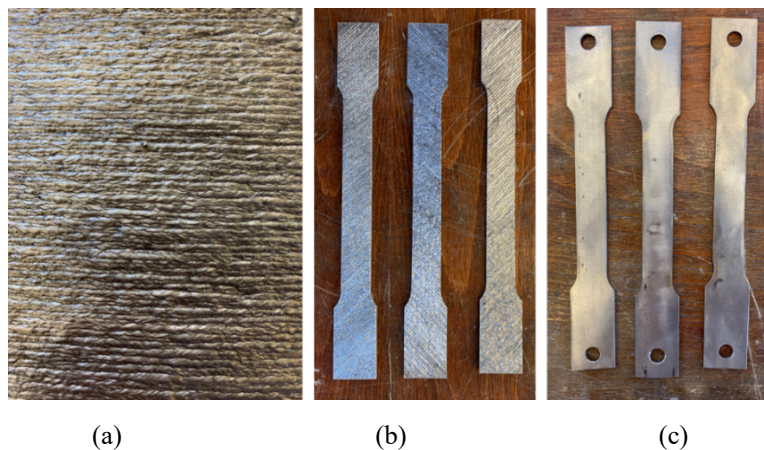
From left to right: (a) the inherent surface roughness of a WAAM printed plate; (b) as-built specimens; (c) machined specimens.
